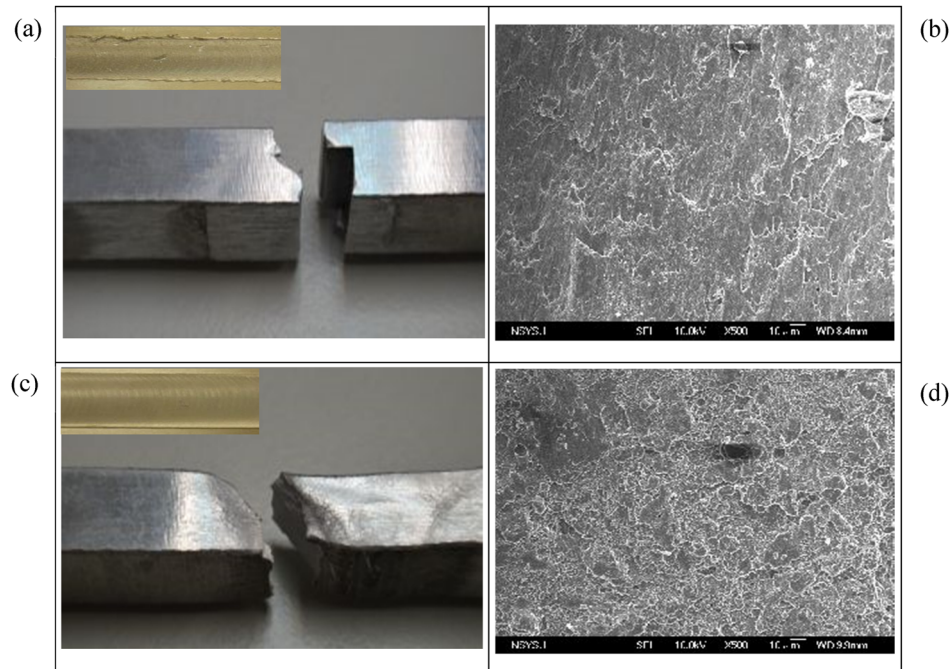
Fractograph and tensile testing of welded joints for test 13 and test 9 tensile specimen using (a, c) the location of fracture and (b, d) microstructures for the traverse-weld specimen.
